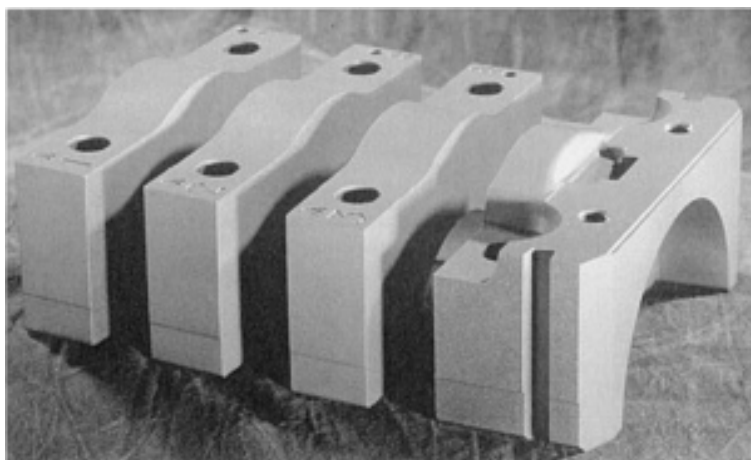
Main bearing cap and end cap for GM 3.8 liter V-6 engine. Source: Ref 51
